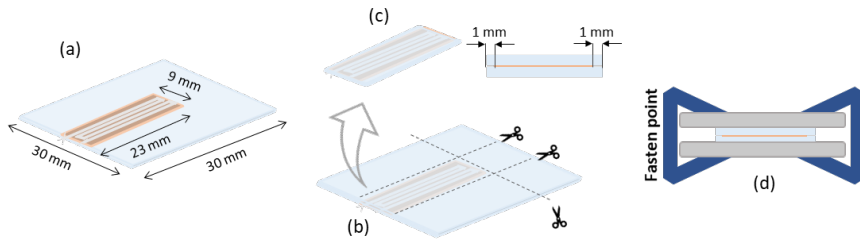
Schematical representation of actuator assembling: (a) assembling of the first GT layer and the heater; (b) assembling of the second GT layer; (c) cutting to final dimensions; (d) Second curing stage of the assembled actuator.
